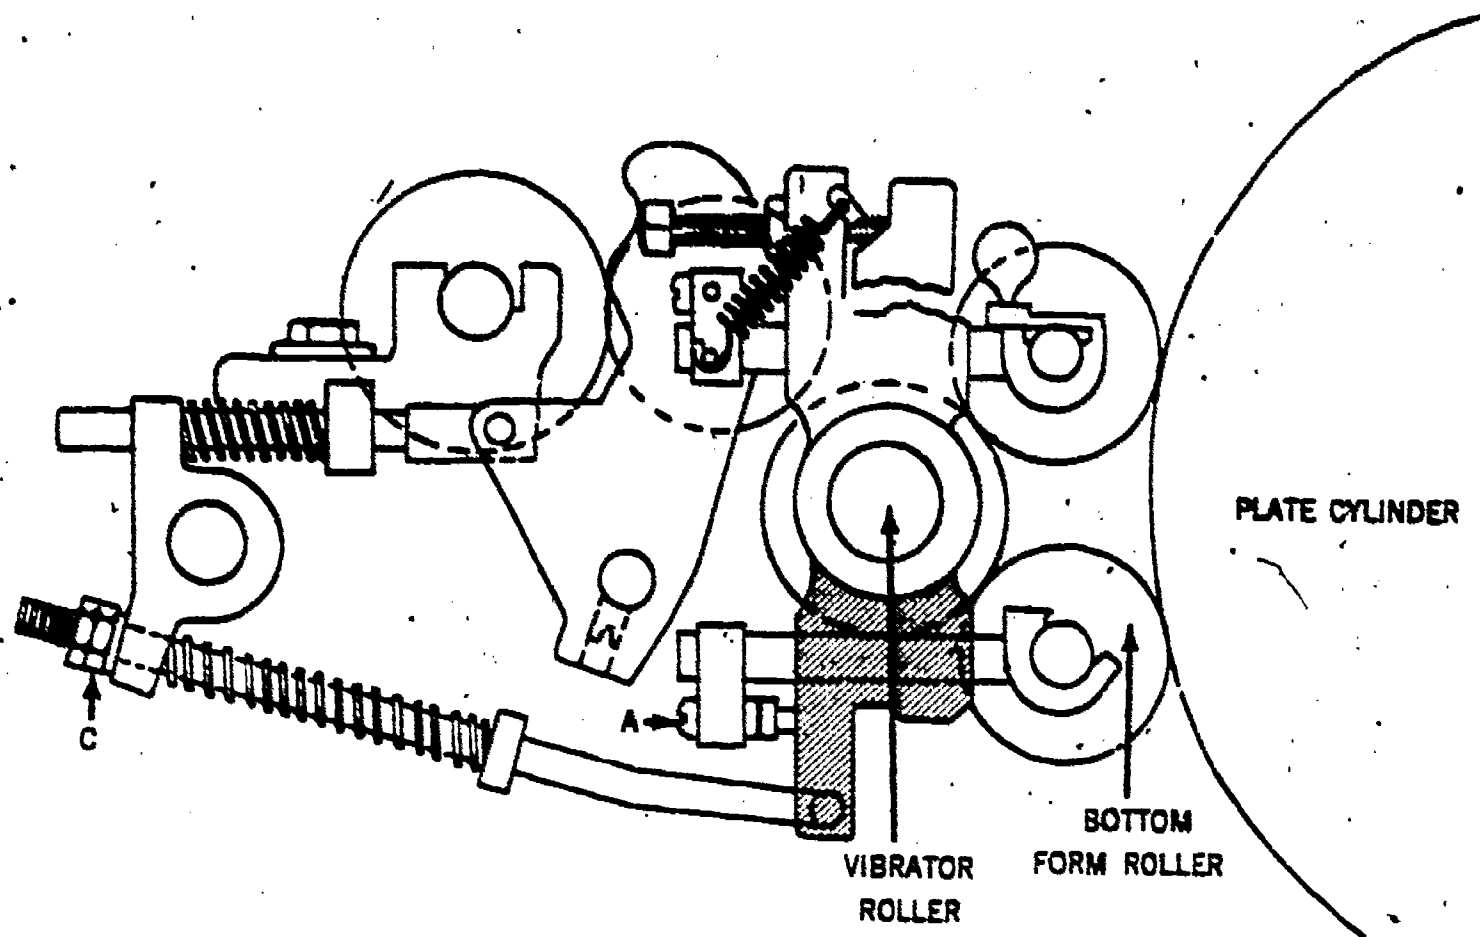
Setting and adjusting bottom form roller (dampening assembly).
